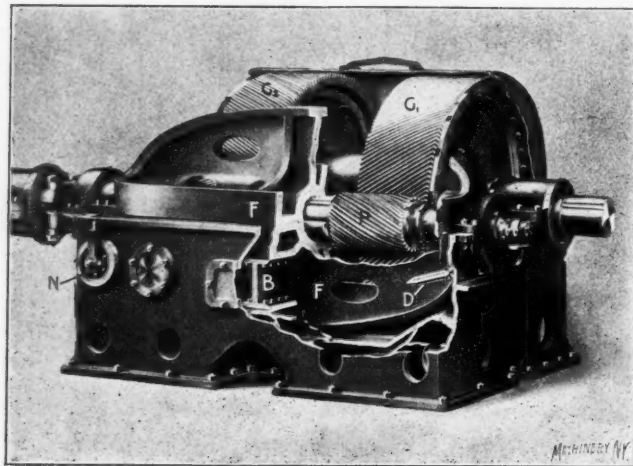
Sectional View of the Reducing Gearing, showing the Floating Frame
